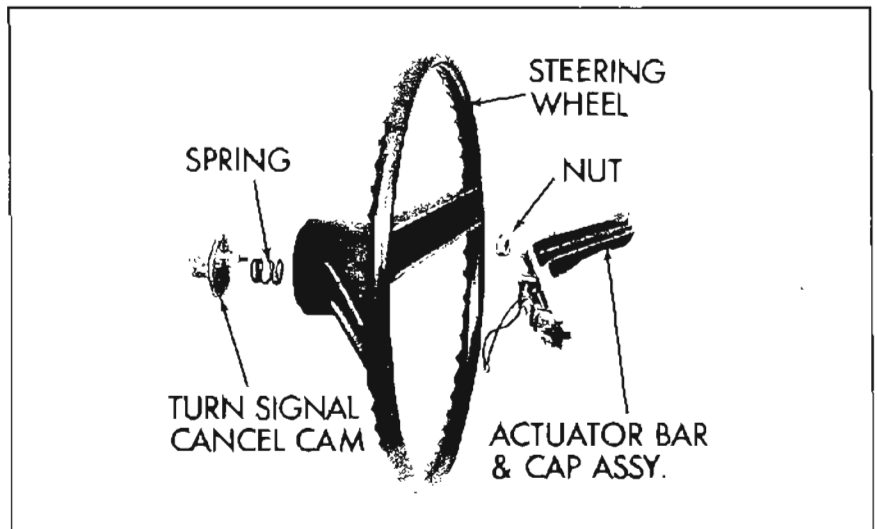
Deluxe Steering Wheel Installation (Non-Tilt Column)
